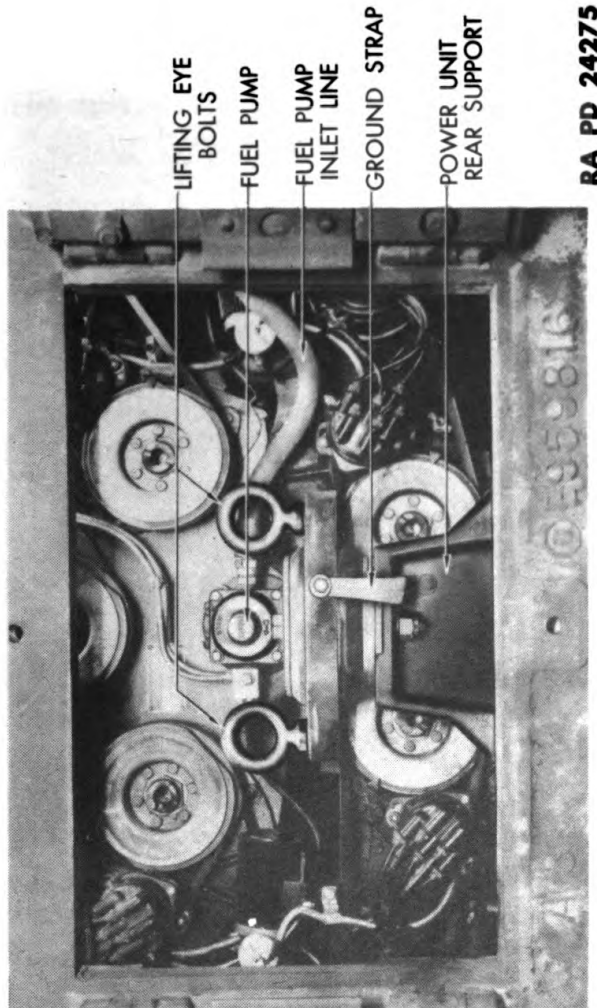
Power Unit Rear Support and Lifting Eye Bolts — Multiple Water Pump Type
